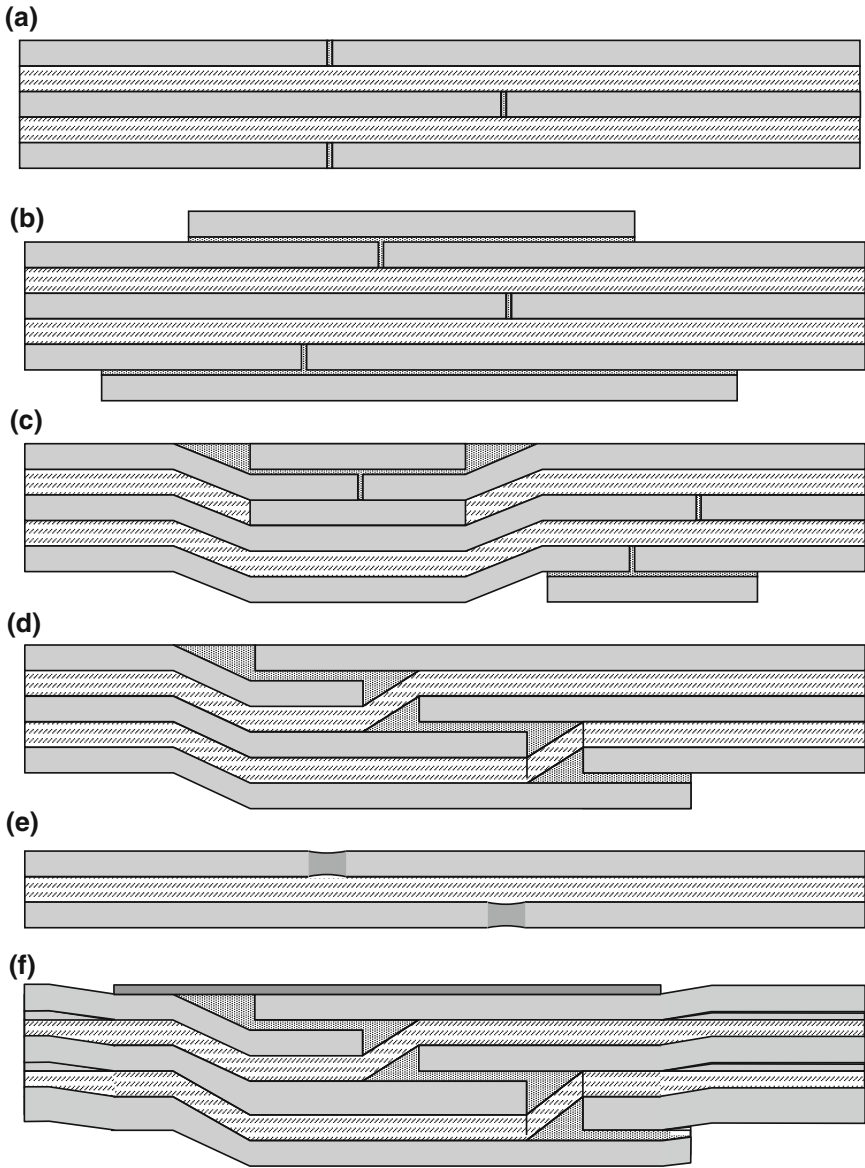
Concepts to build up a FML panel out of smaller metal sheets: butt-joint (a) [31], doubler lateral strap-reinforced butt-joint (b) [32], splice doubler joint (c) [22], overlap splice (d) [33], butt-welded joint (e) [34] and modified overlap splice joint (f) [35]; image adapted from [1]
